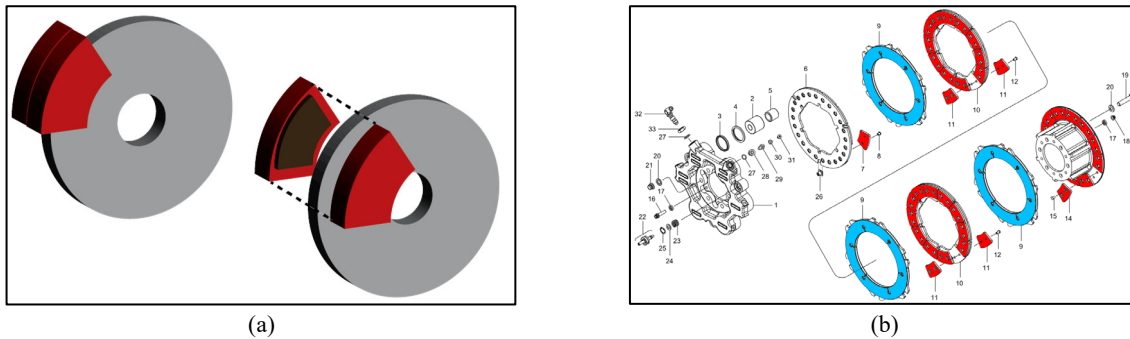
Components of typical brake assemblies, automotive (a) and aerospace (b). Automotive brake assemblies are typically composed of a single pair of brake pads that grip the rotor. Brake assemblies for business class and passenger aircraft employ multi rotor and multi brake pad (highlighted in blue and red, accordingly in b). The aerospace brake assembly shown here is used on aircraft such as the Pilatus PC-12 [21,22].
